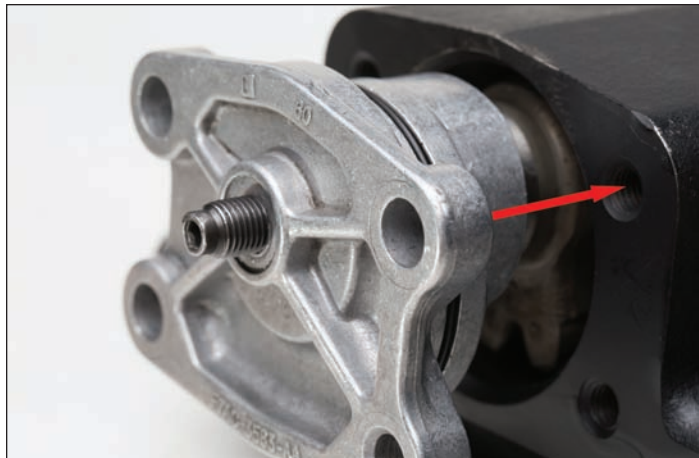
Gear lash on the original Mopar gear, RedHead part #2879, is adjusted one turn at a time. The same adjustment for RedHead part #2879U (Figure 2) is made with an external adjustment screw.
